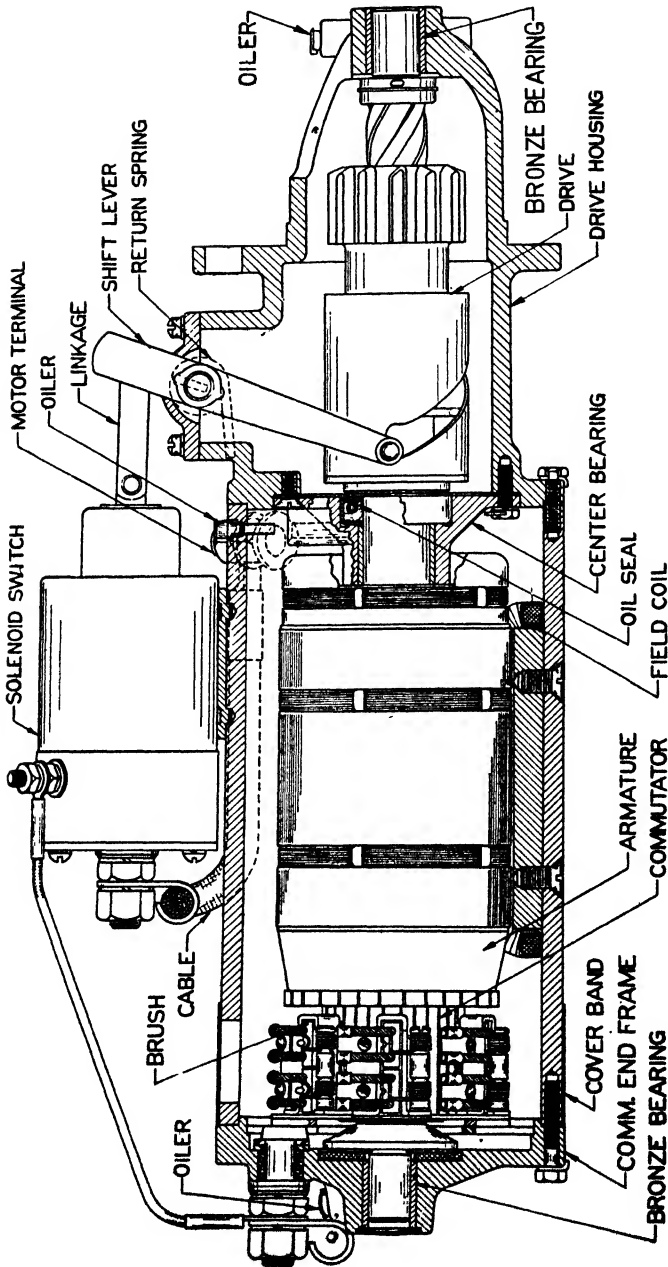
LONGITUDINAL SECTION OF DELCO-REMY ELECTRIC STARTER FOR DIESEL ENGINES.
